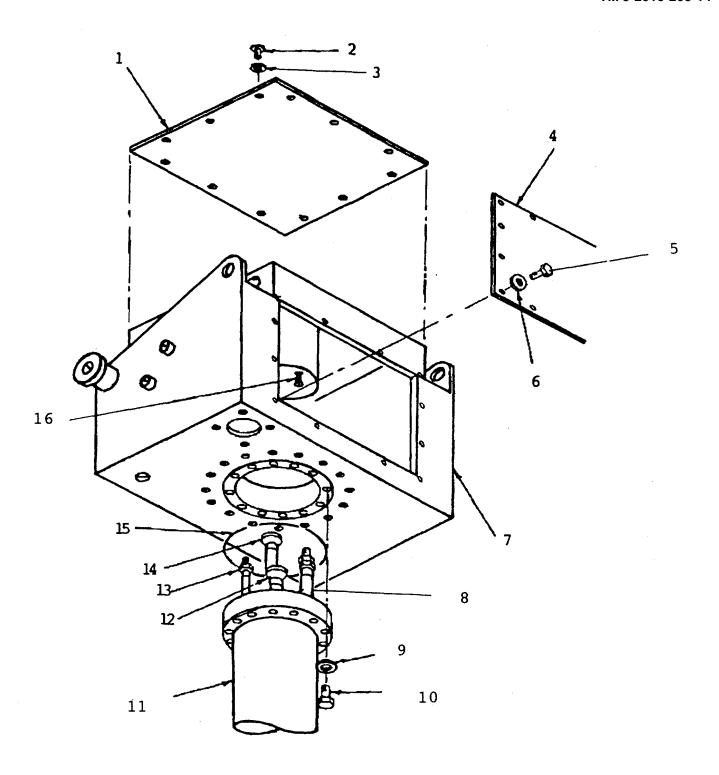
(1 of 3). Upper Outdrive Housing Assembly
